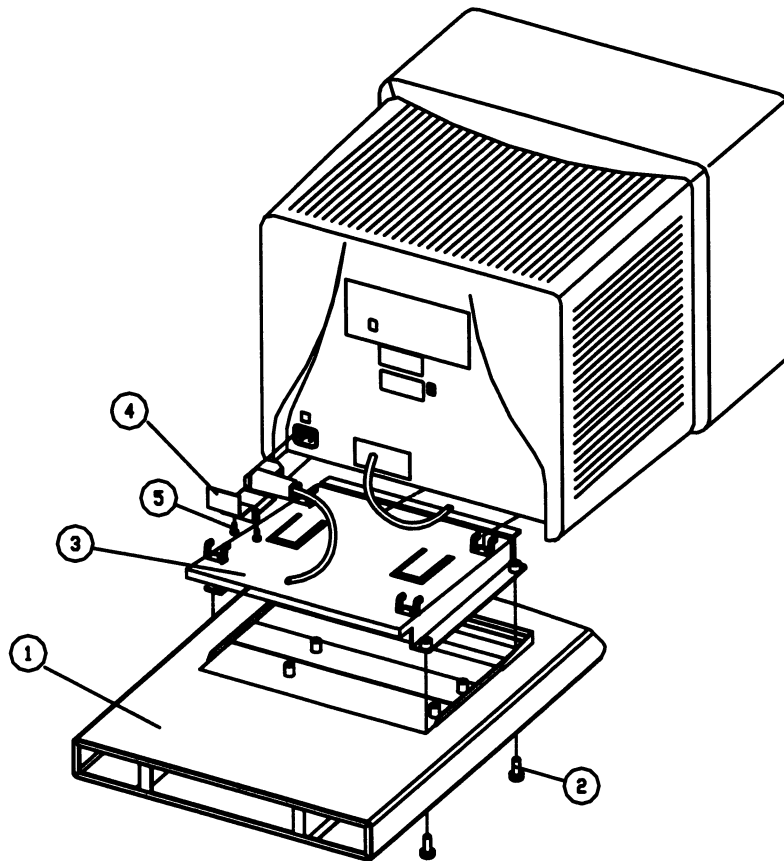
Exploded view, Video Display, D-VHC17, rev. 03
